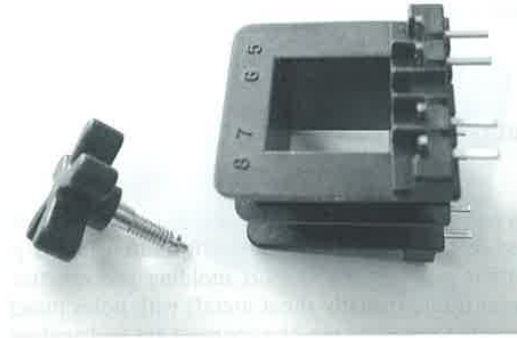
A metal thread overmolded with plastic cap for better grip and an electrical coil component with molded-in metallic pins. (Parts courtesy of Engineering Industries, Inc. Madison, and Quantum Devices, Barneveld, Wisconsin, USA.)
